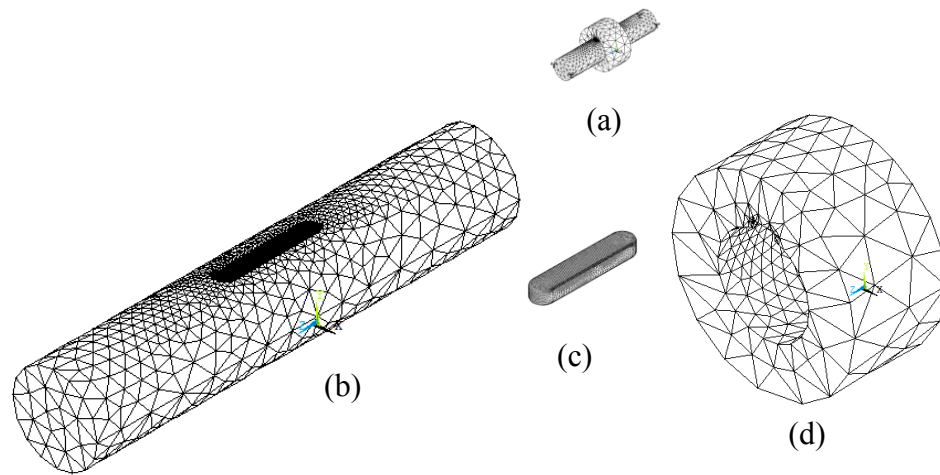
FEM model of bending model of hub, key and shaft with end milled keyway, (a) Assembled parts, (b) Shaft, (c) Key, (d) Hub
